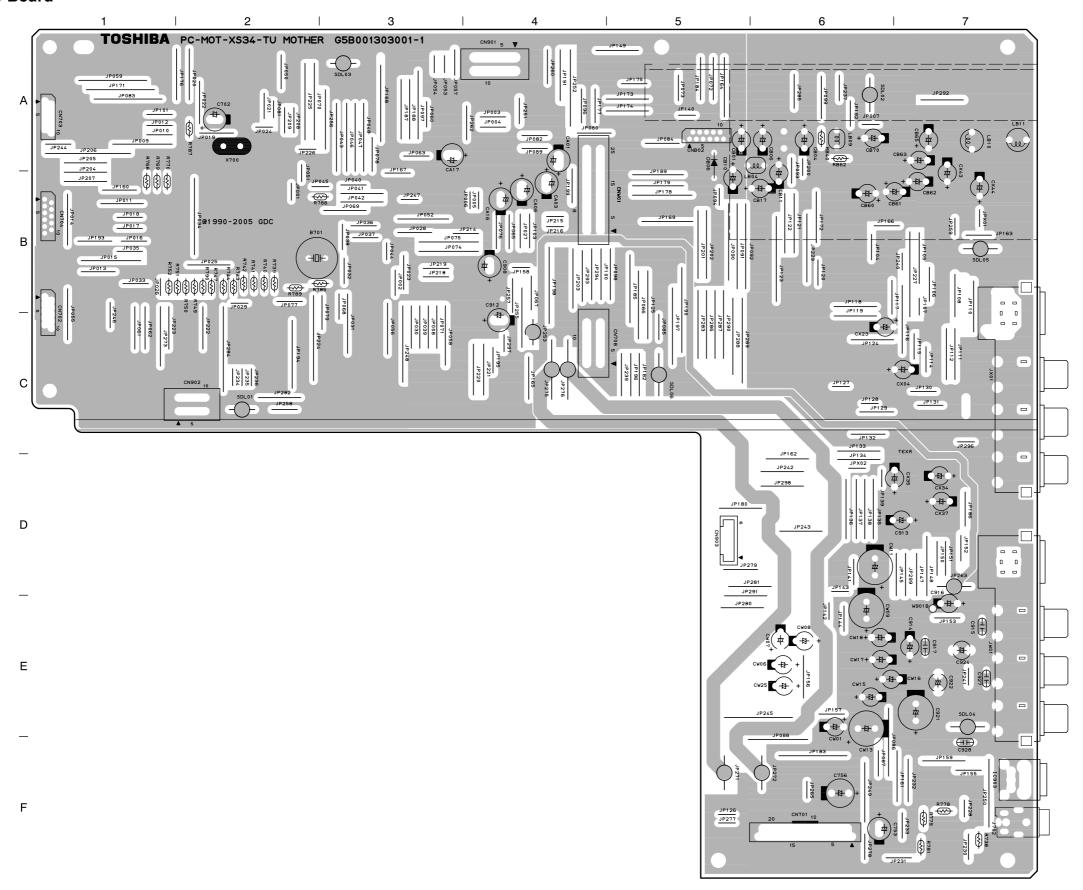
EU05 Mother PC Board (Top side)
